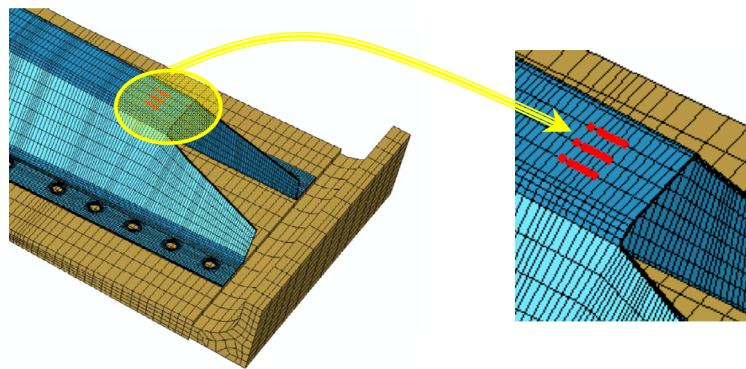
Stringer installation tool to push the stringer feet to IT surface.
